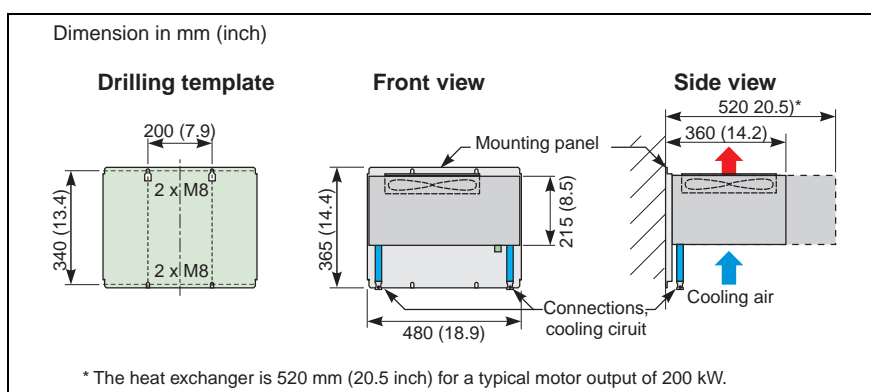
Dimension drawing heat exchanger for wall mounting, size class C and D
